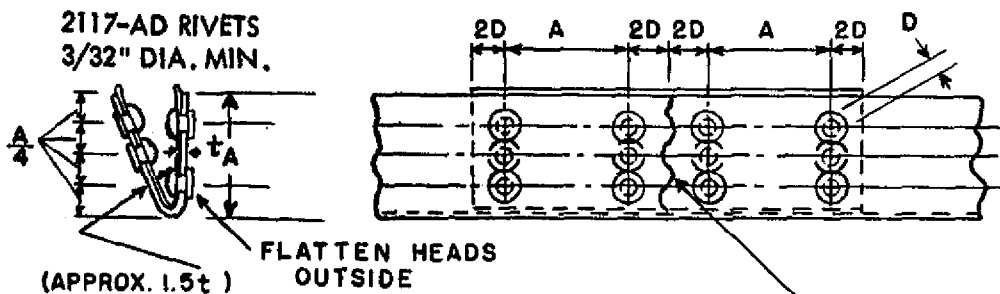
Typical repair for buckled or cracked formed metal wing rib capstrips.
